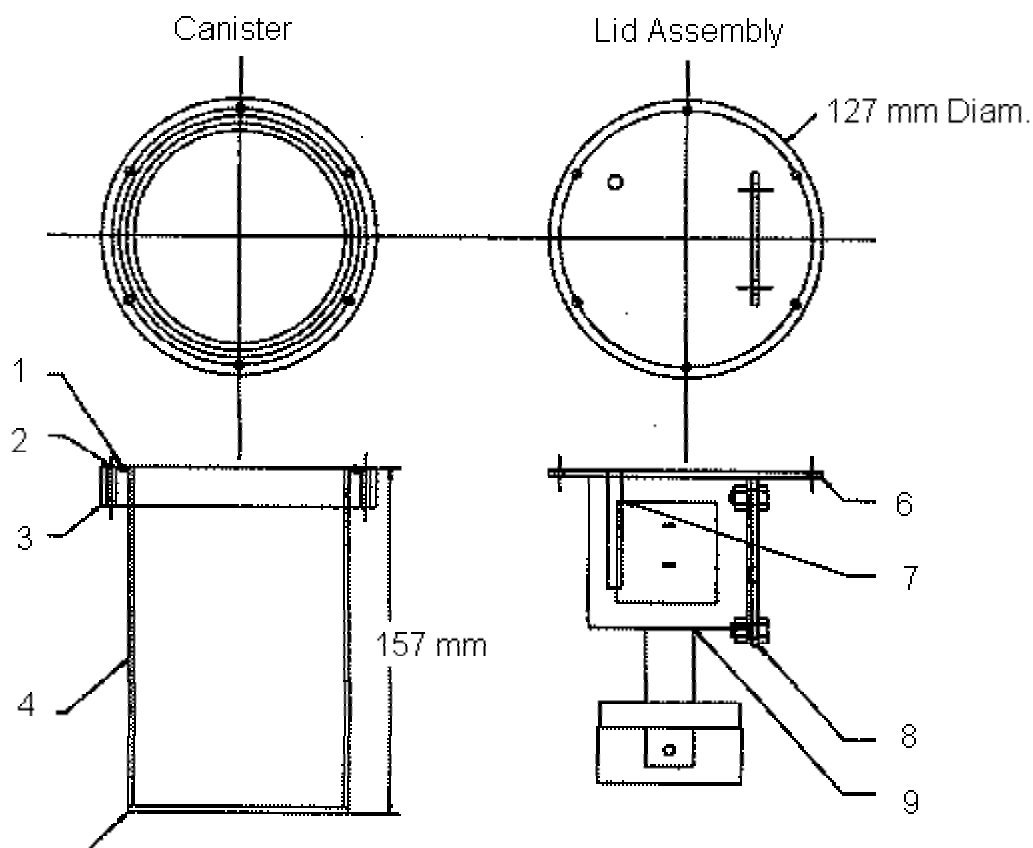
Schematic diagram of the solenoid-driven impactor. Key: 1. 2.5 mm O-ring and groove. 2. Tapped 8-32 for 6 screws. 3. 19.1 mm-thick steel ring welded on. 4. 102 mm OD X 2.2 mm wall 304 stainless steel tube. 5. 3.2 mm-thick 304 stainless steel plate welded on. 6. 3.2 mm-thick steel lid with 6 thru holes. 7. 6.4 mm tube for thru wires. 8. 3.2 mm-thick steel plate welded to lid. 9. Solenoid with 417 g steel weight welded to the armature.
